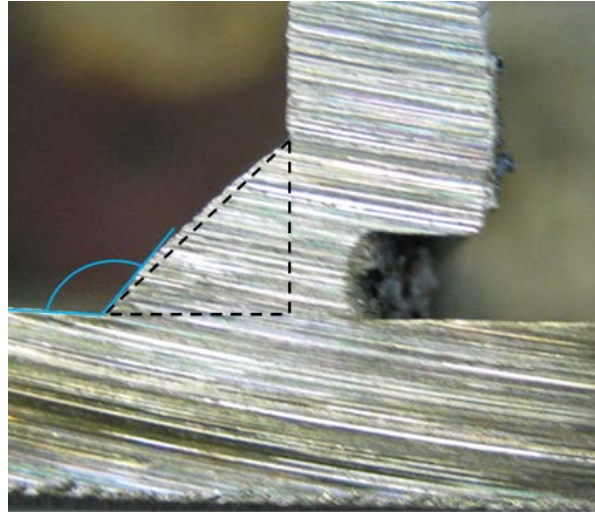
A Cross Section of Weld Bead in “Large-Root opening” Experiment
